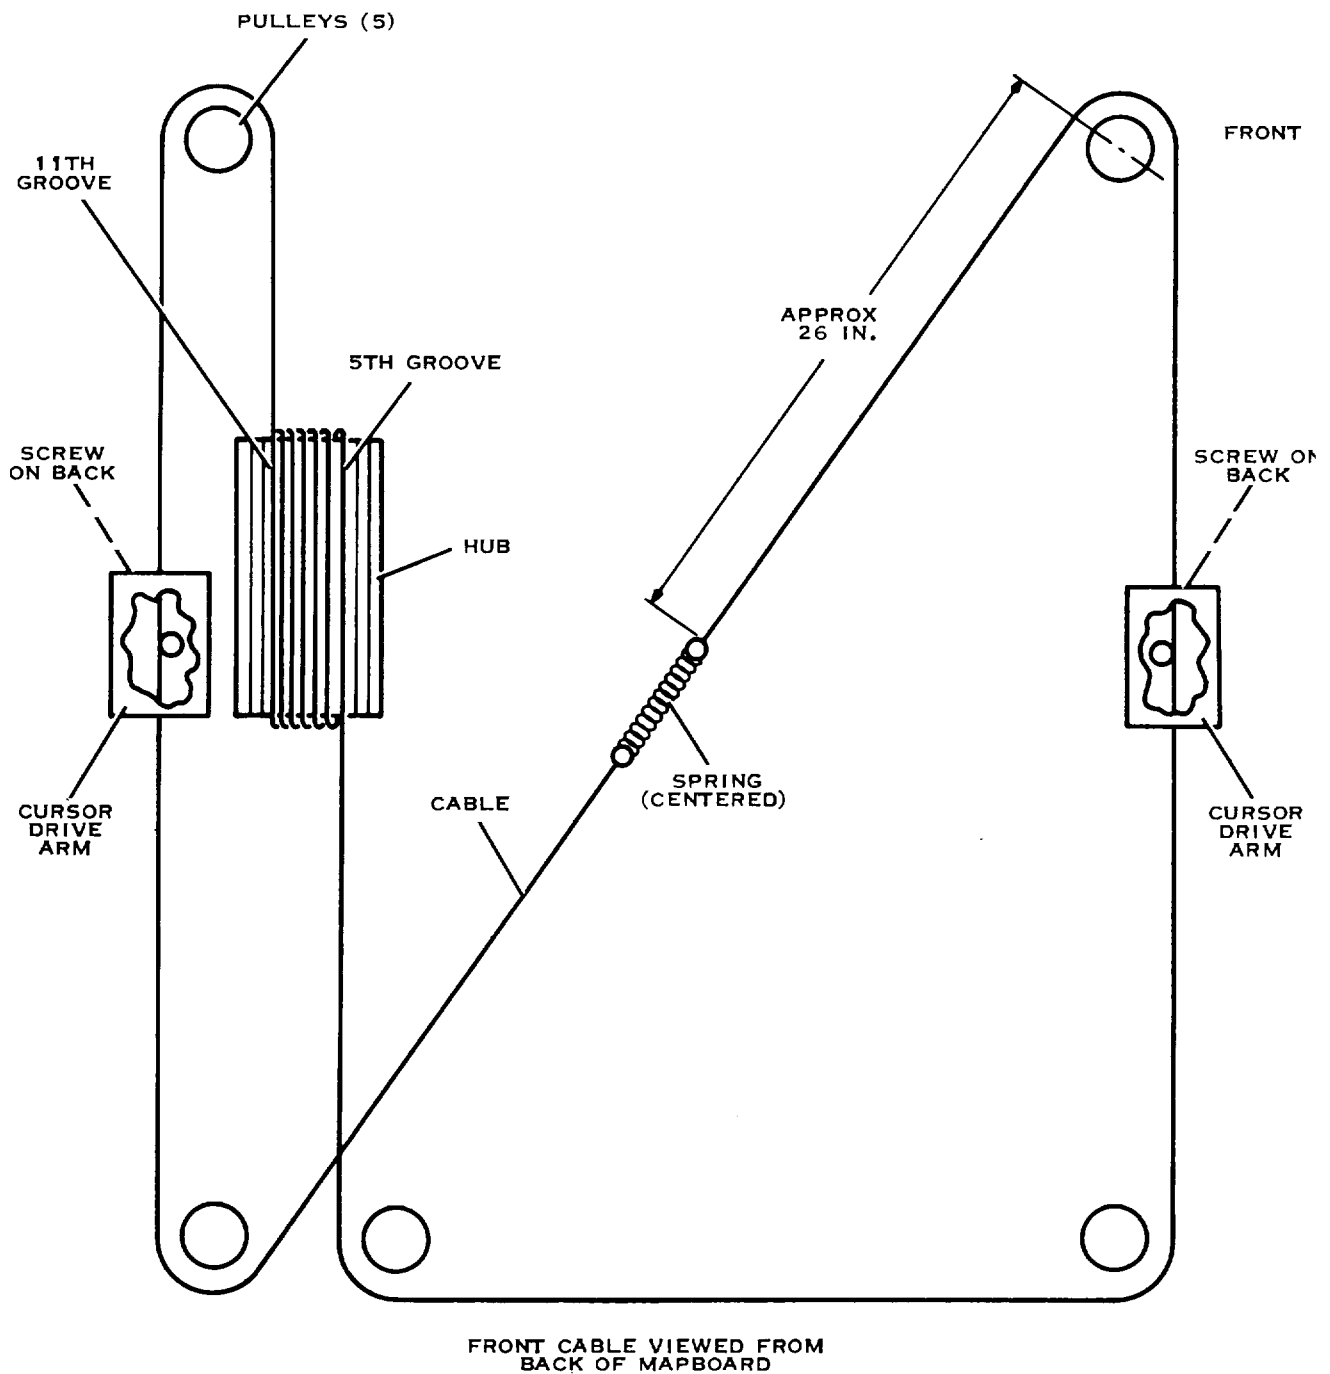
Mapboard Cable Threading Diagram (Sheet 1 of 2)
